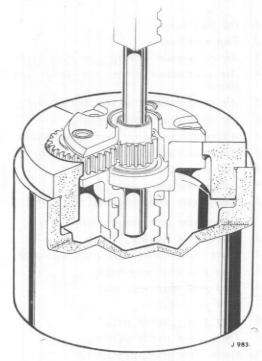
Split bush T.74822 pot fixture T.74823, and adapter T.74824, for removing planet gear carrier cover.
